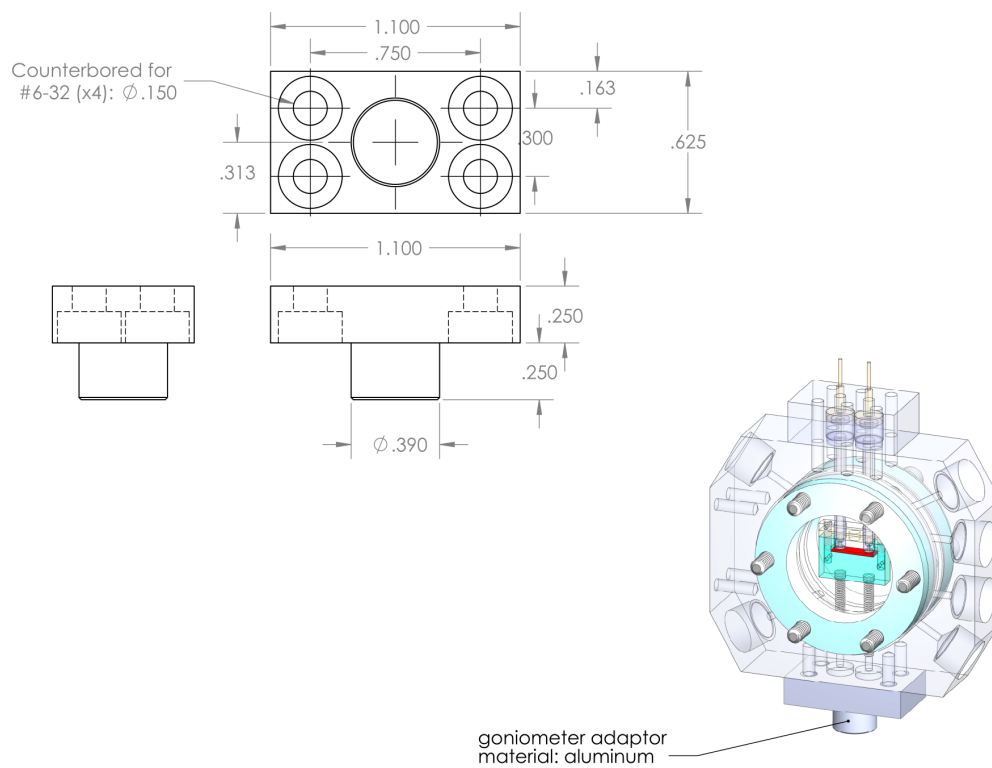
CAD drawing of goniometer adaptor for transmission cell
